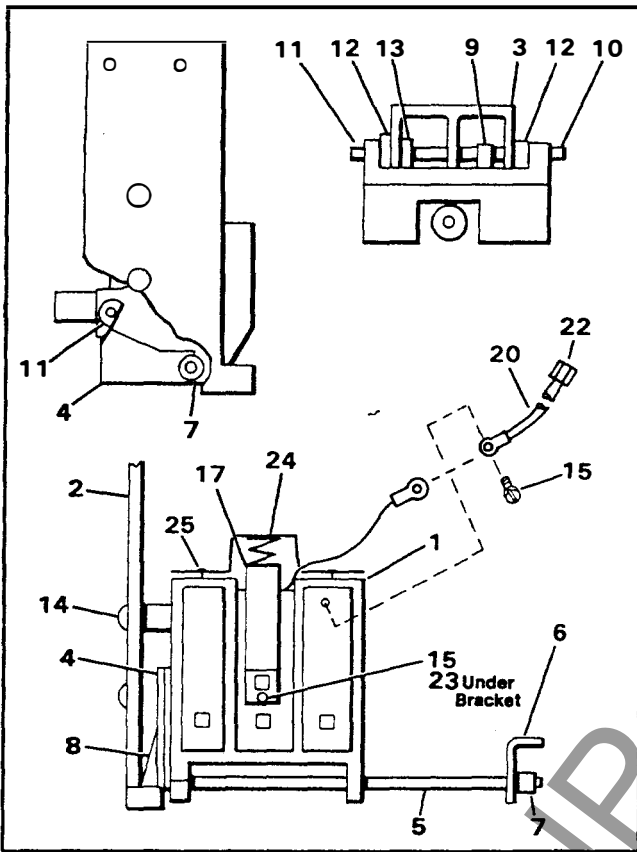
Blown Fuse Trip Assembly 18-399-805-501
